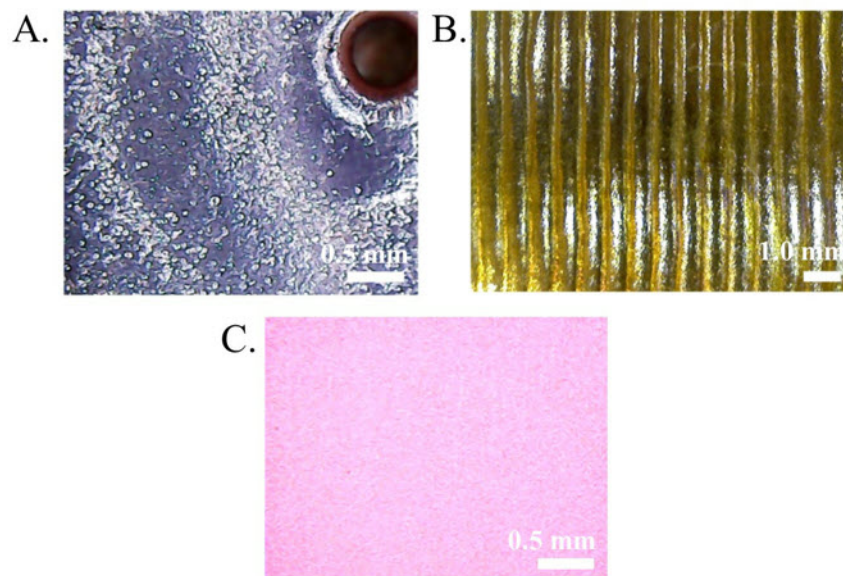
Optical images of PCB surfaces after MS-plating with 225 W of acoustic power and at DC 1 A/dm<sup>2</sup> for 1 hour, showing after plating
